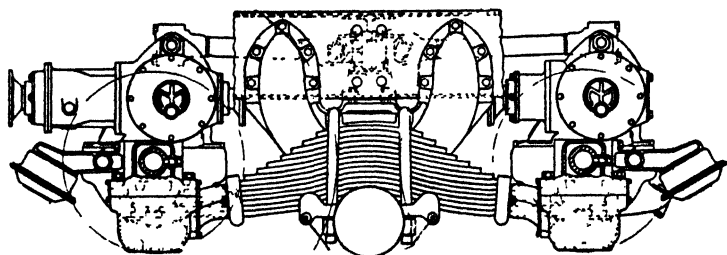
SIDE VIEW OF MACK FOUR-WHEEL BOGIE
